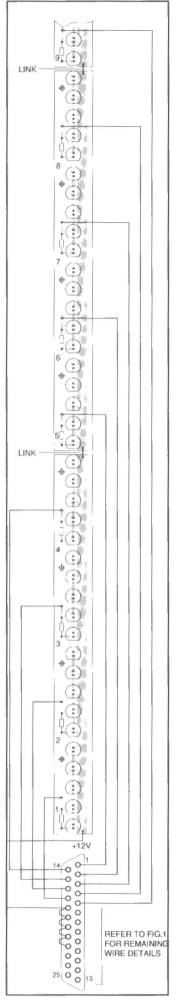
the LED display wiring (part only shown) connect wiring on copper side
